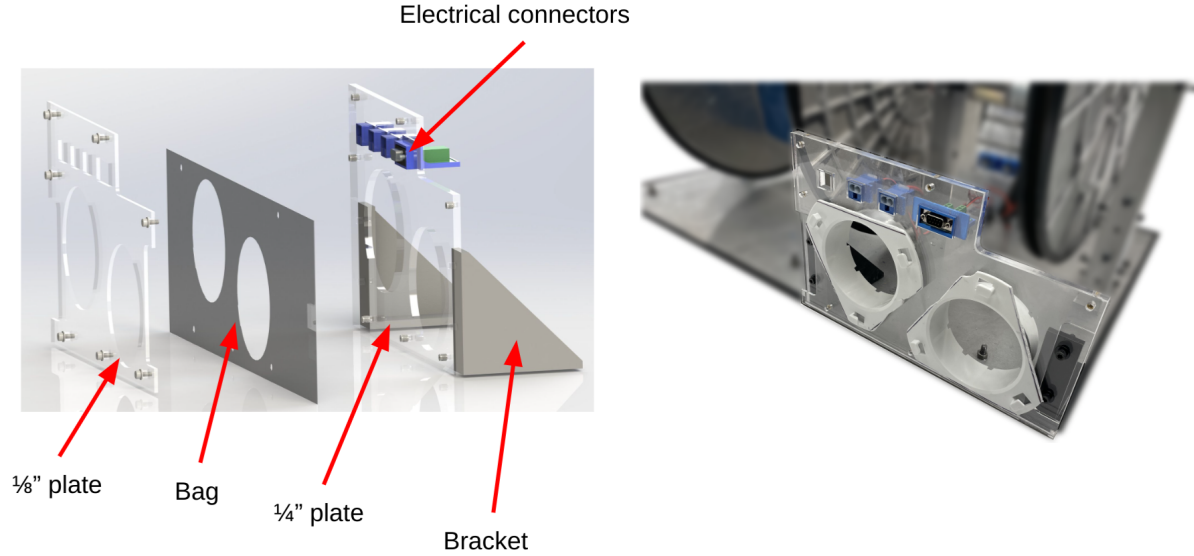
SolidWorks rendering of the back-plate assembly along with the finished prototype.
